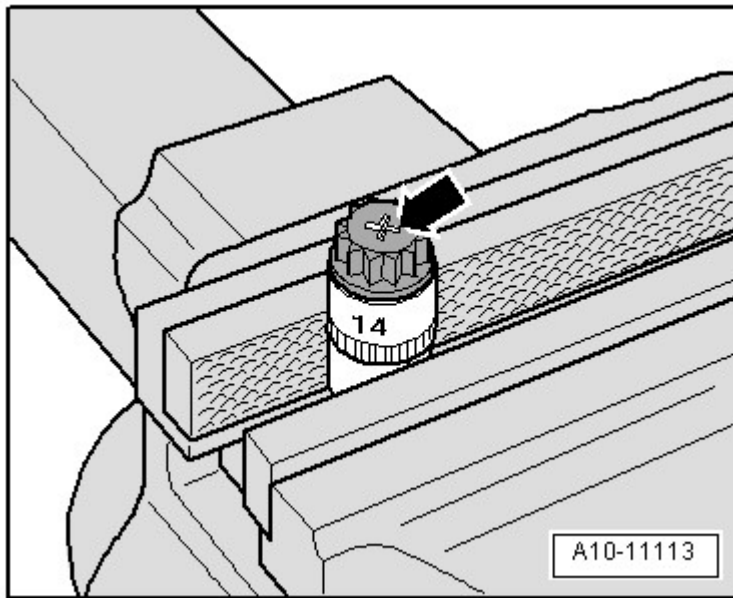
Identifying Bolts Marked With An "X" May Not Be Used Again
